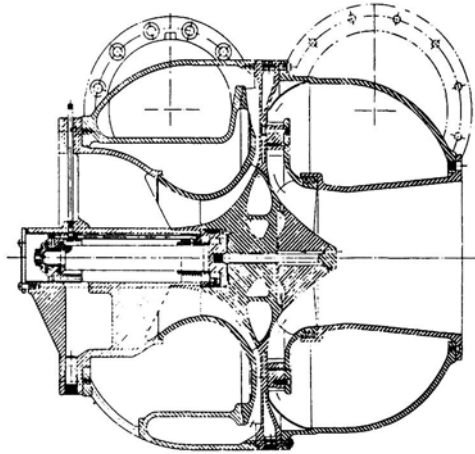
Outboard mounted bearings at one end (De Javal)
